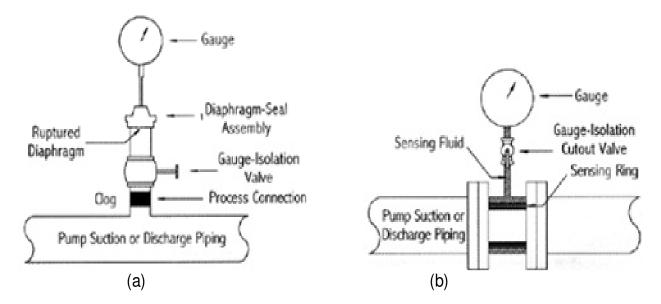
(a) diaphragm assembly valve assemble (b) Ring gauge valve isolator assembly (NSWCCD, 2008).
